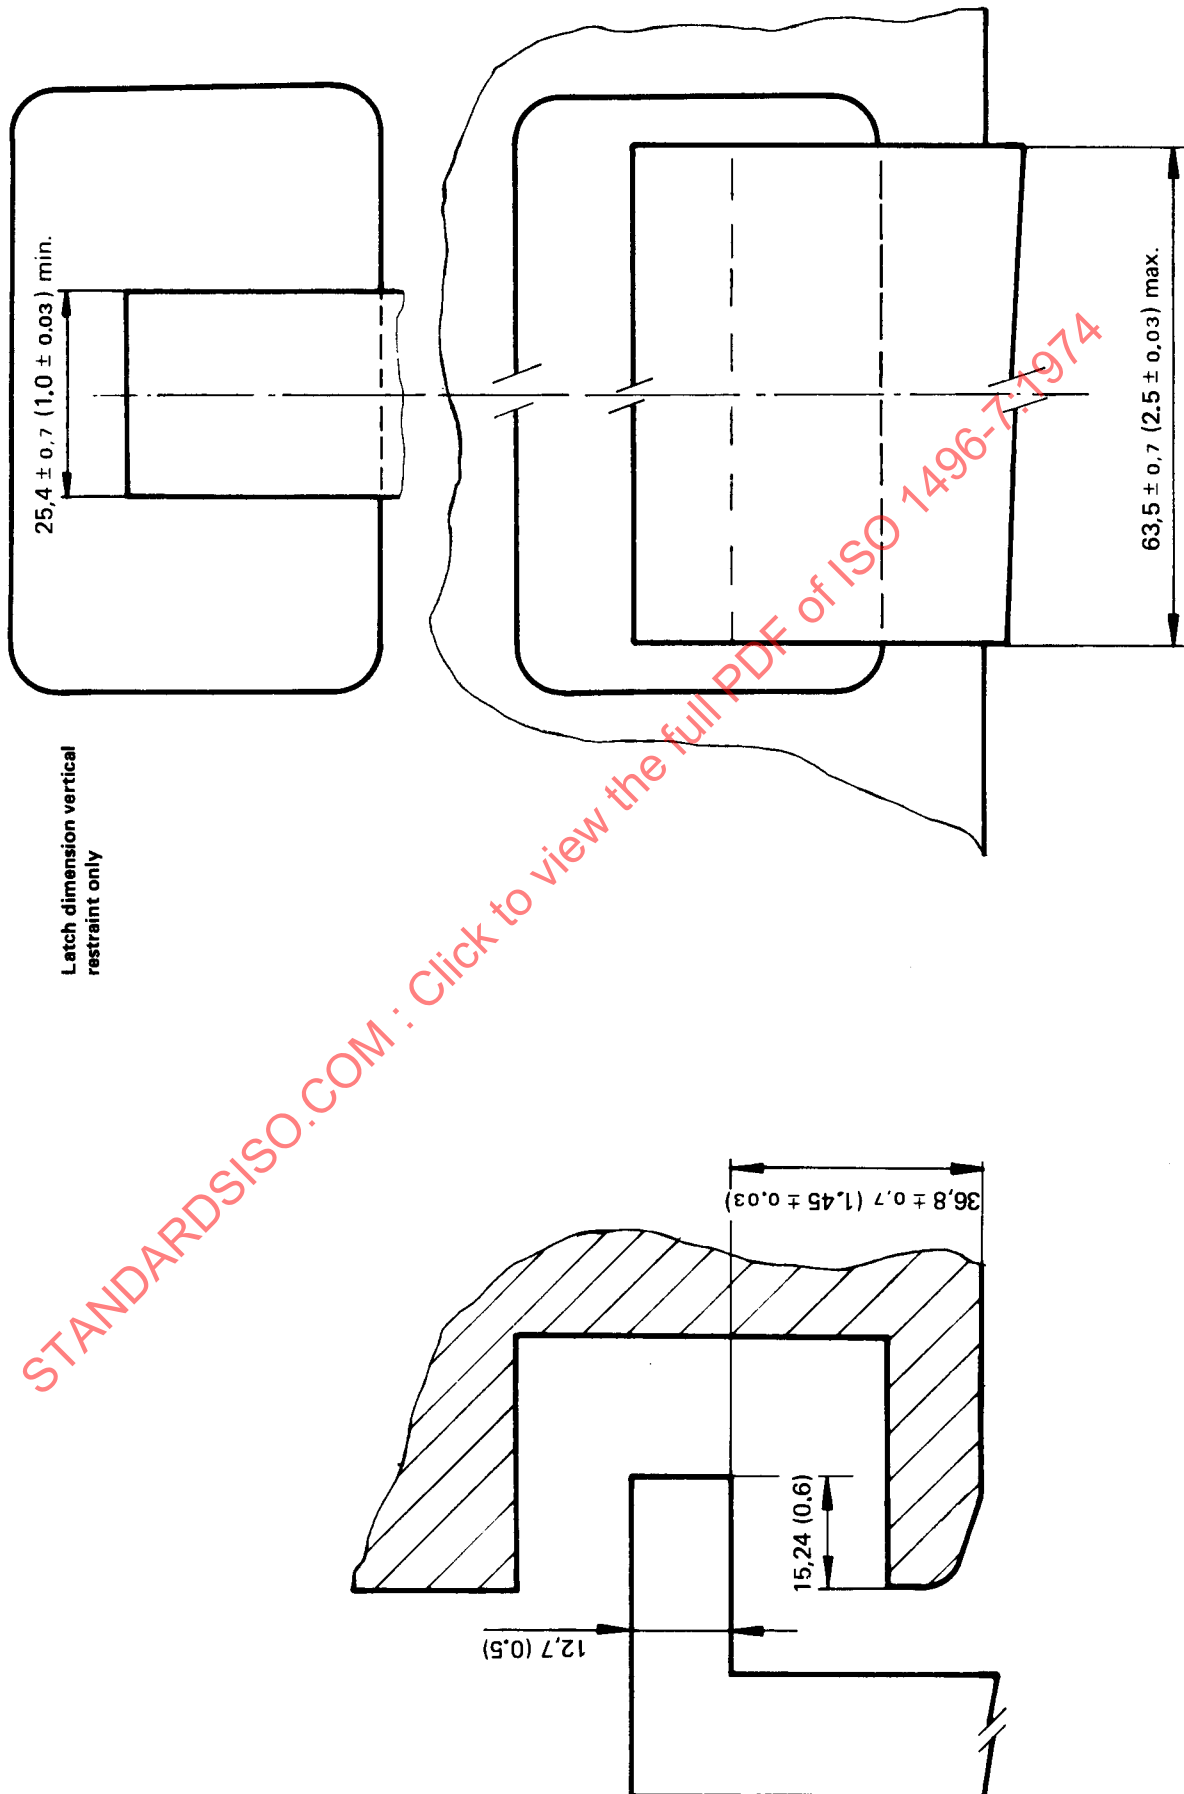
Side latch dimensions — Fore, aft, up and side loads
